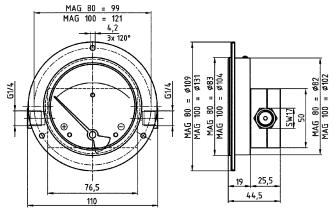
Connection on right and left sides; 3-hole fixing, panel mounting bezel
